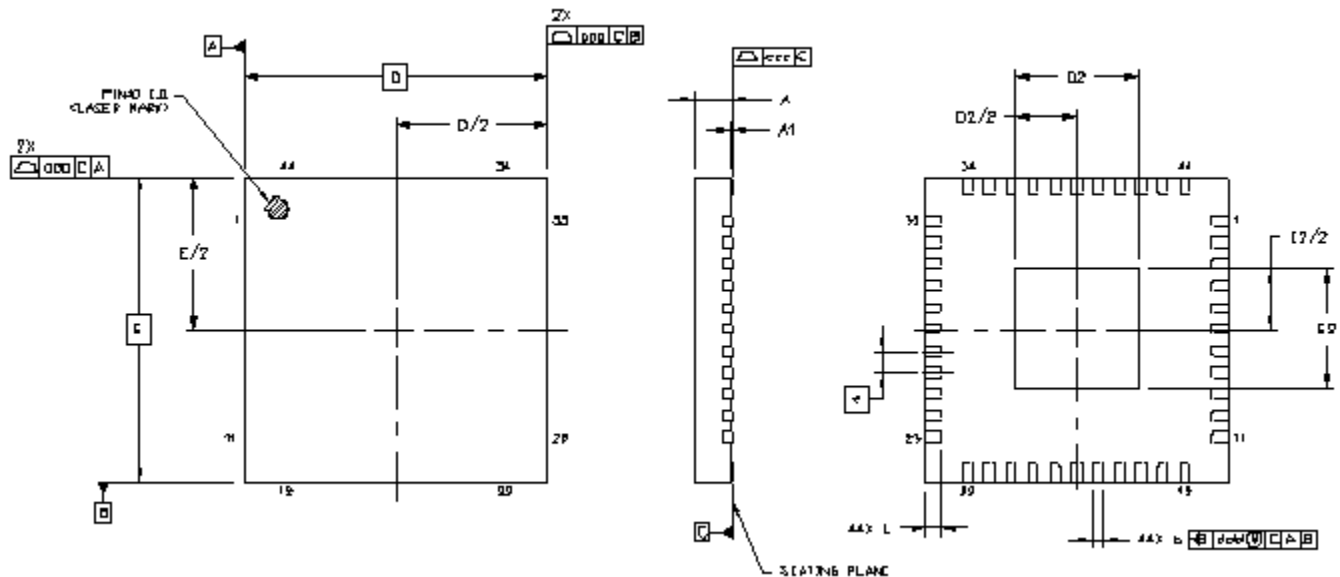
7x7 mm 44-QFN Package Diagram Dimensions
